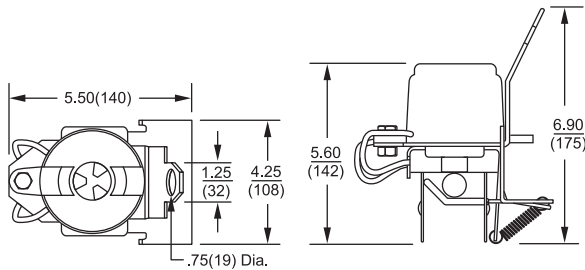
Figure A — Indicator with Attached Sensor. Hotstick Mounting.
